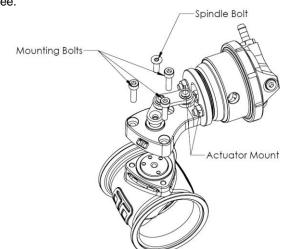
Exploded drawing of assembly of Pneumatic Straight Gate.
